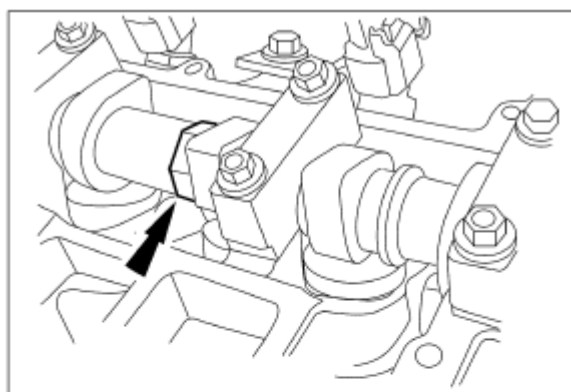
Locating Bolt & Intake Camshaft Drive Gear
